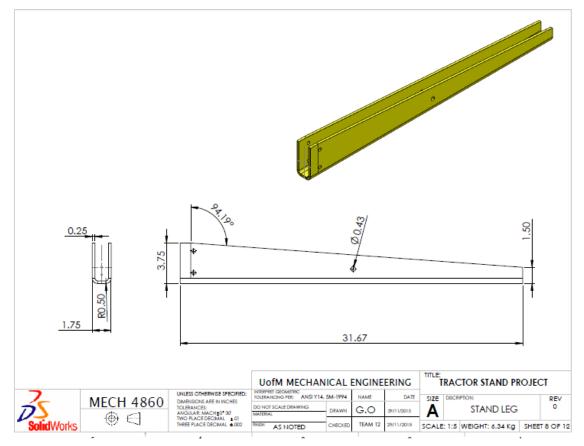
Drawing of final stand leg design, with dimensions in inches.
